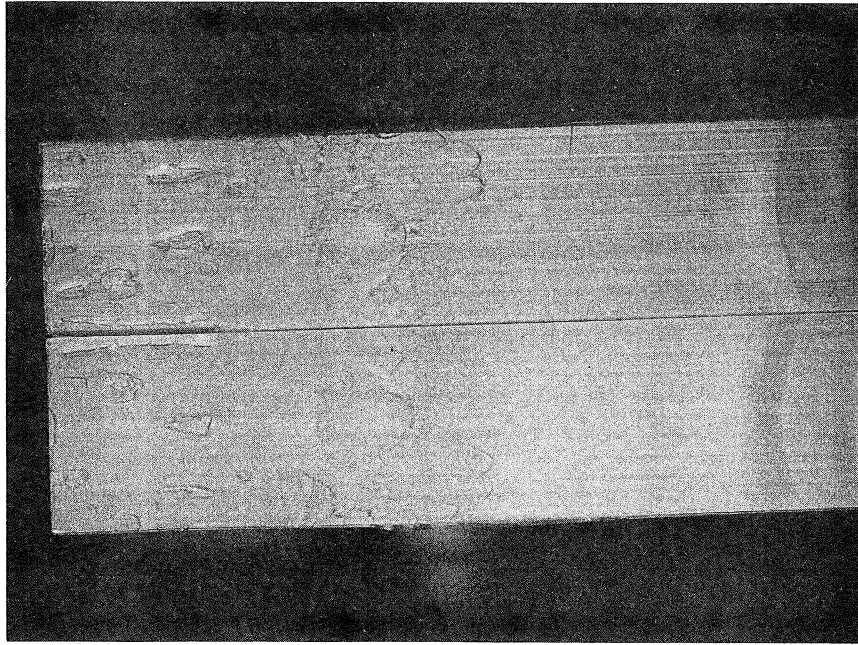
Fracture Surfaces (2X and 50X)
